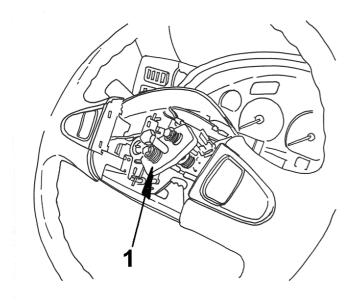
Utilizing Wheel Puller to Remove Steering Wheel
